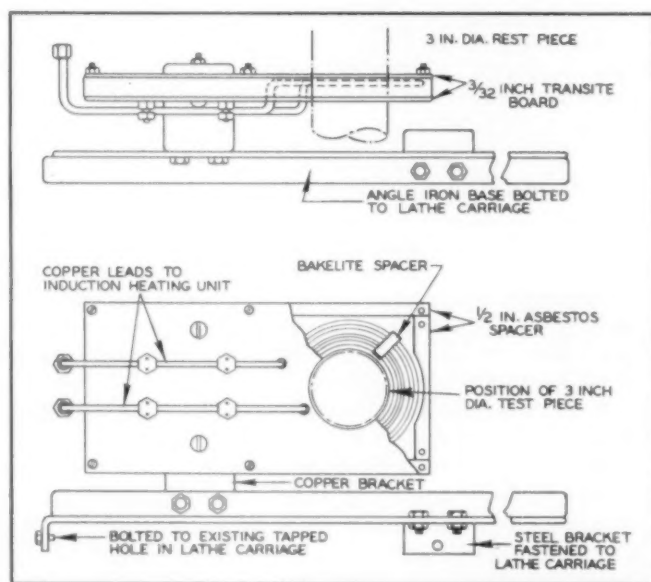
(left) shows the mounting of the induction coil for heating test samples. Transite boards held with brass screws and asbestos spacers formed the upper mounting for the coil, and the assembly was bolted to the lathe carriage. Fig. 8 (right). The gas torch
